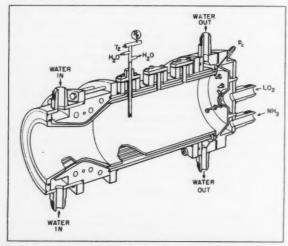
Test motor of 1300-lb thrust for combustion study with probes
